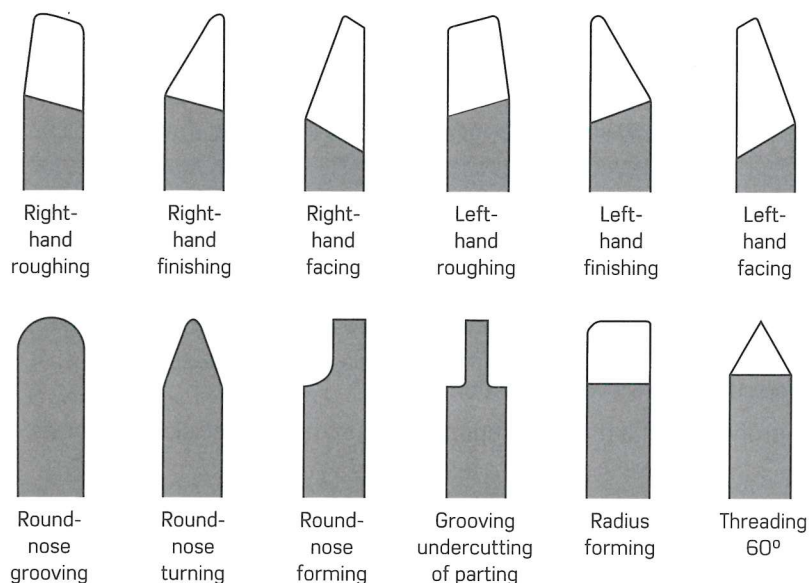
Lathe tools should be selected depending on the feature to be produced
